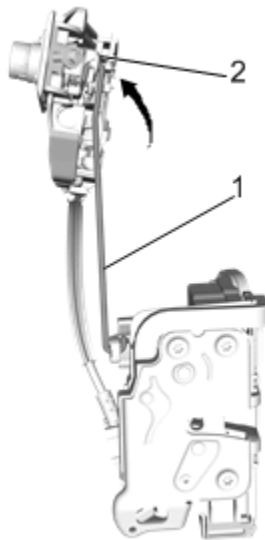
Front Side Door Lock Rod And Front Side Door Lock Cylinder
